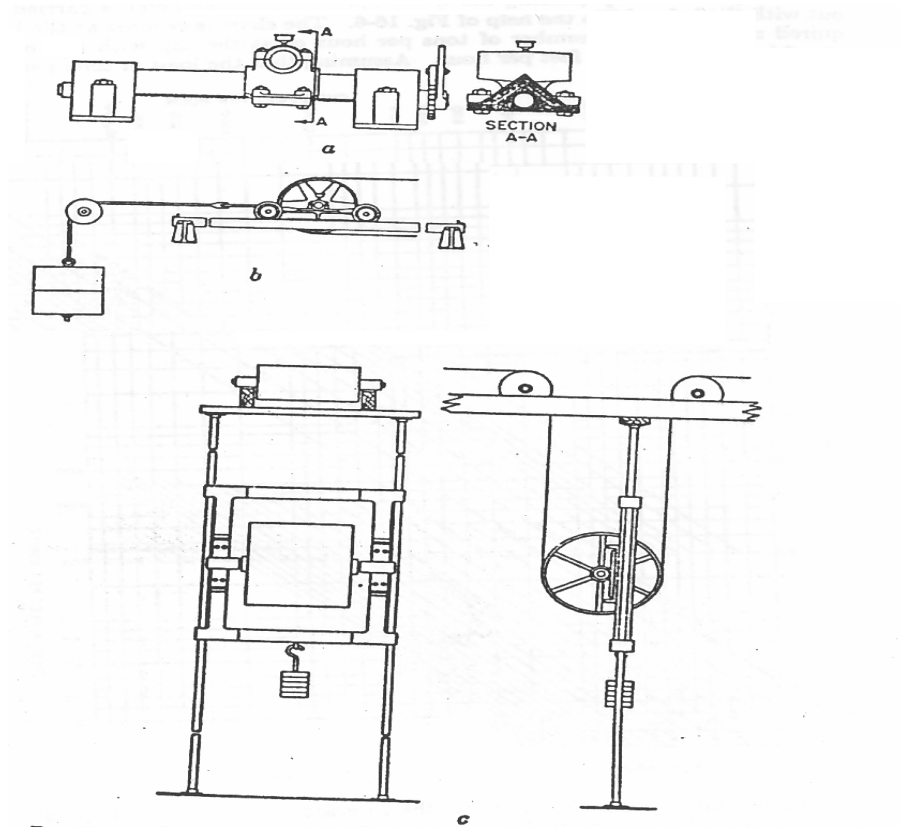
Belt-conveyor take-ups: (a) steel angle frame; (b) horizontal gravity take-up; (c) vertical gravity take-up.
